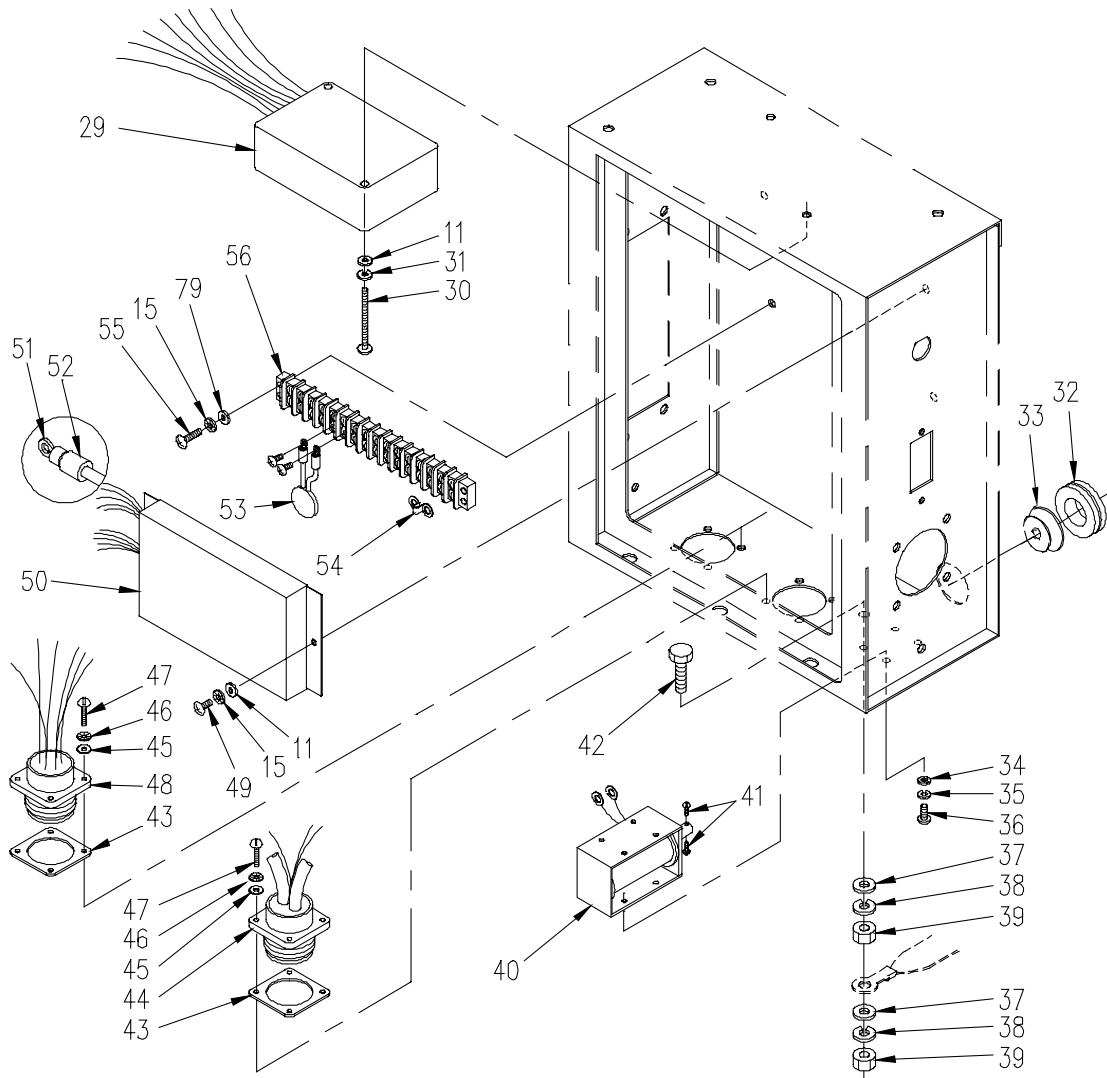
Control Panel Assembly (MEP-531A) (Sheet 2 of 3)
